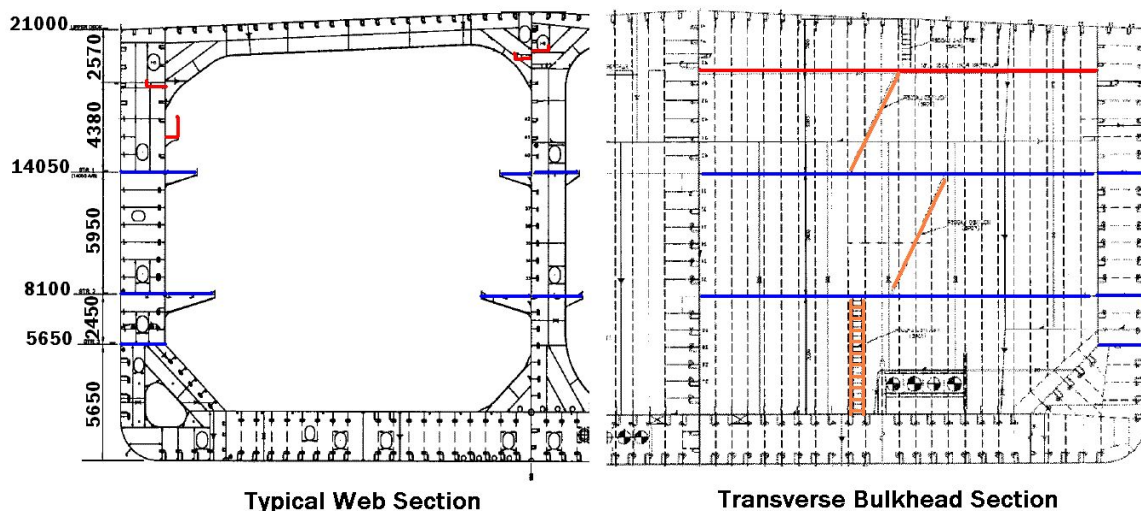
Typical Web Section & Bulkhead Section of Aframax Tanker
